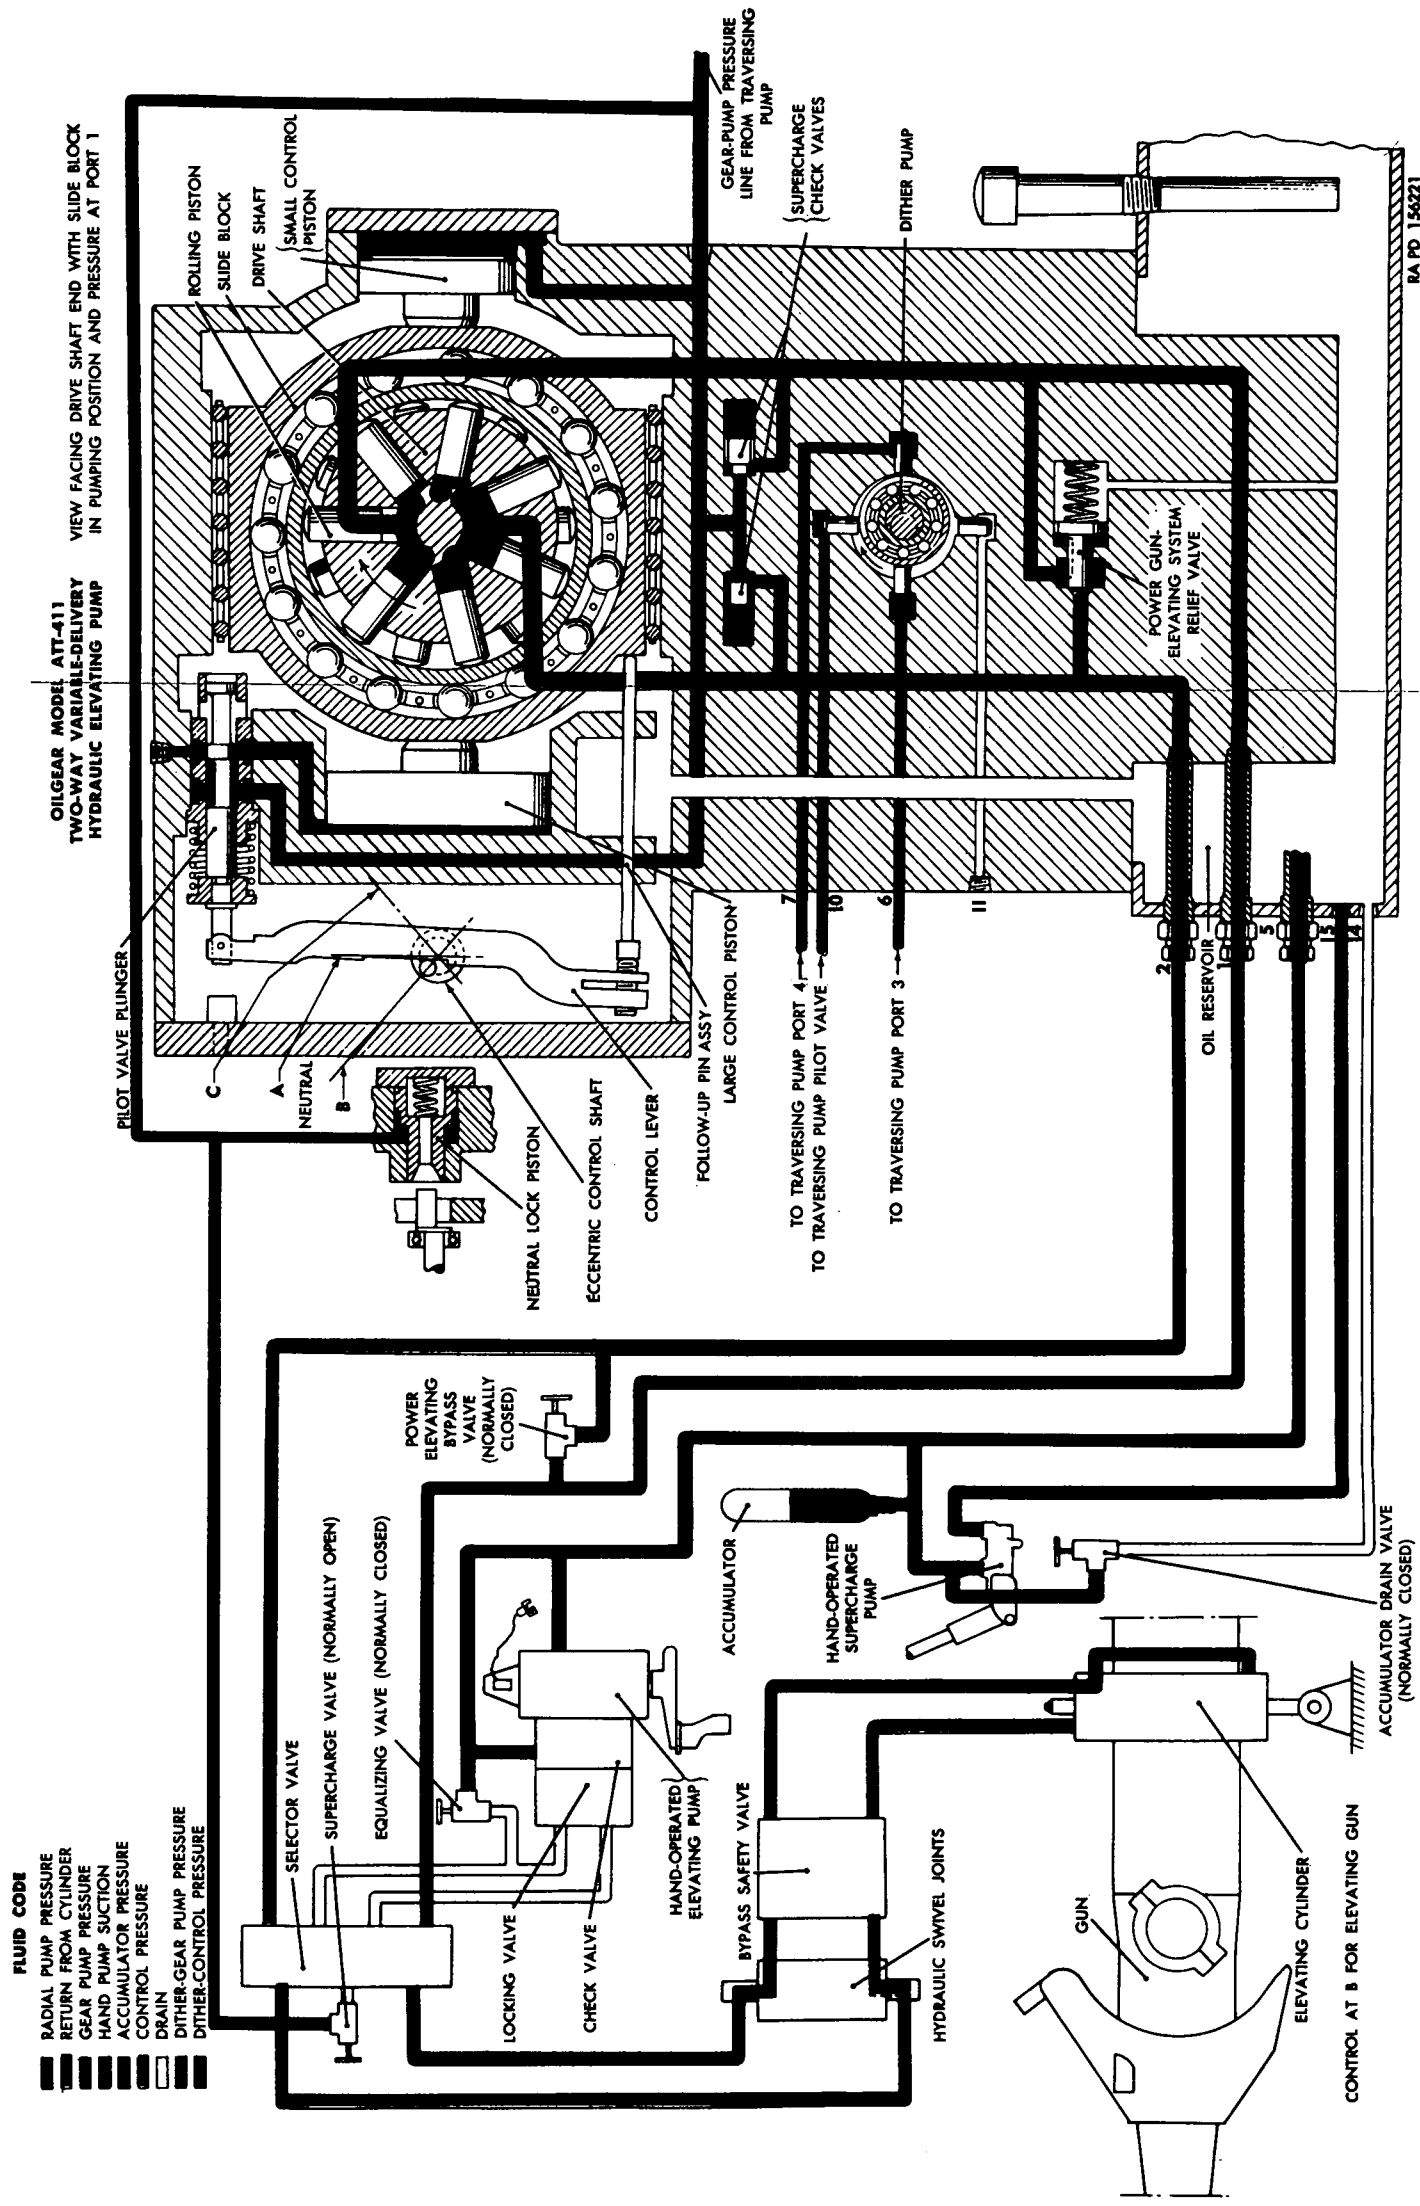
Hydraulic gun-elevating system oil circuit (elevating).
